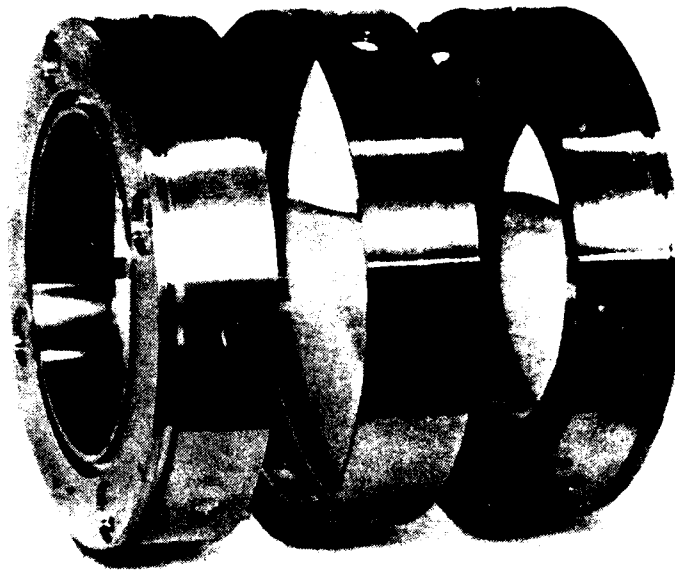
General Arrangement of Modified Crane Housings and New Center Housing for NASA-Solar Seal Assembly
